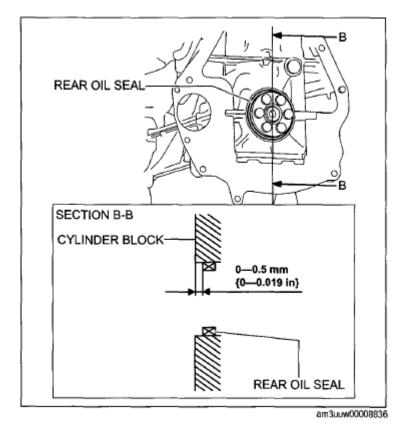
Identifying Rear Oil Seal Press-In Dimension
